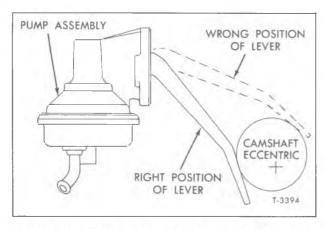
Positioning V6 Engine Fuel Pump for Installation
